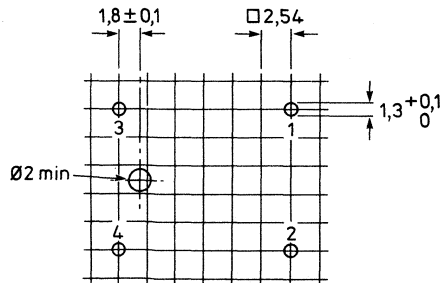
Hole pattern for mounting on a printed-wiring board (component side).
